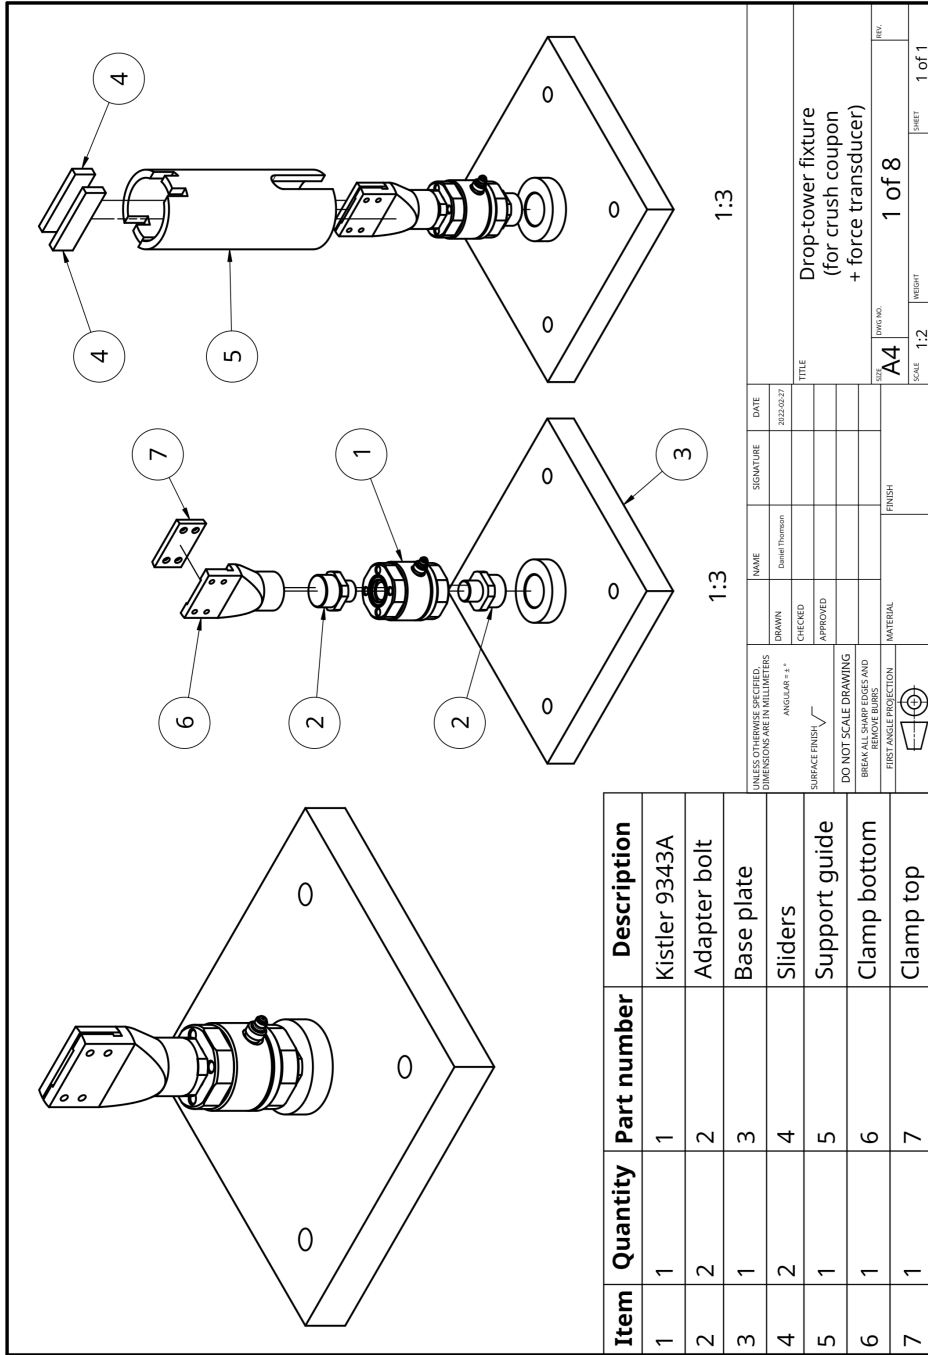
Exploded drawing of the experimental fixture, including the force transducer.
